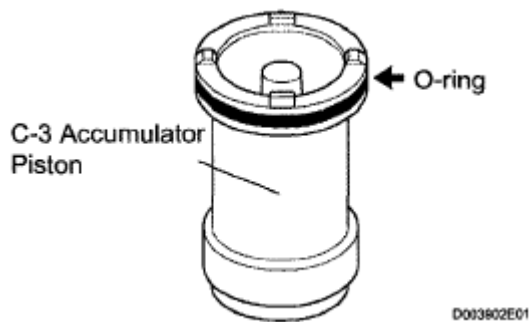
Locating O-Ring And C-3 Accumulator Piston
